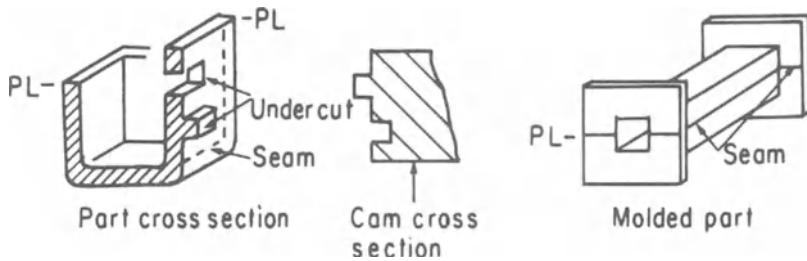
Split mold with mold sliding -cam actions for outside undercuts will show seams in the molded part that may be objectionable. These can be partially hidden by locating them in the least conspicuous areas when designing the molds.
